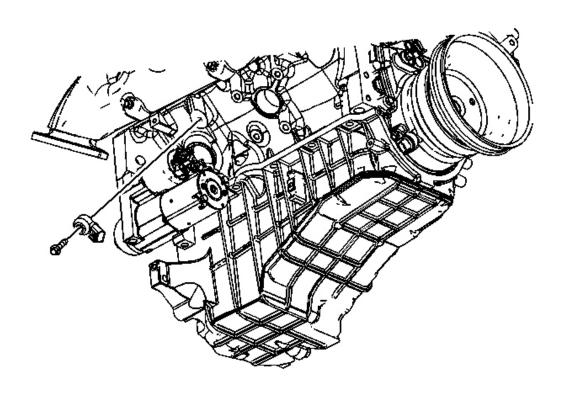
View Of Knock Sensor & Bolt Courtesy of GENERAL MOTORS CORP.
